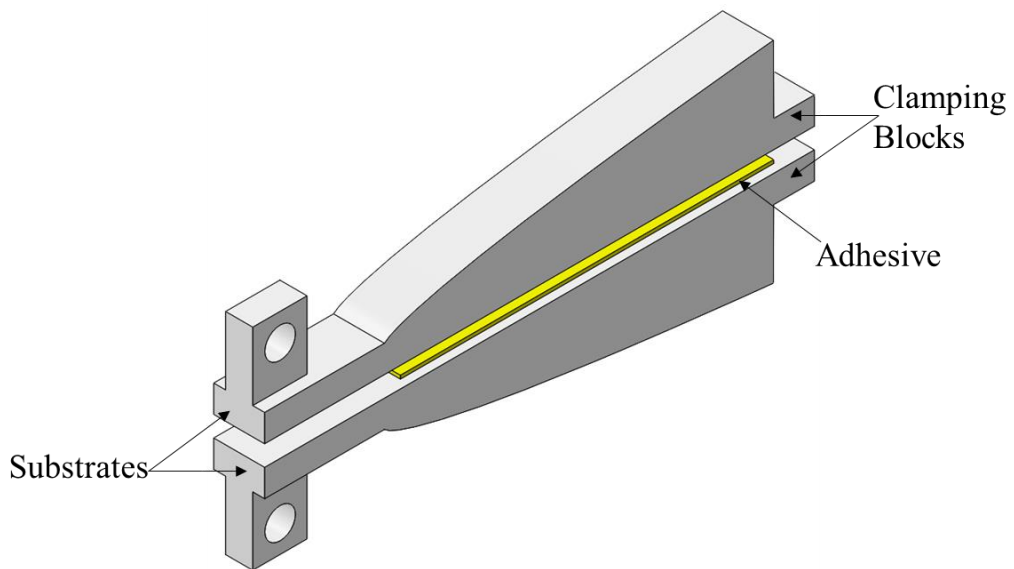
CAD model of the Tapered Double Cantilever Beam and final clamping strategy employed for joint fabrication with fixing blocks.
